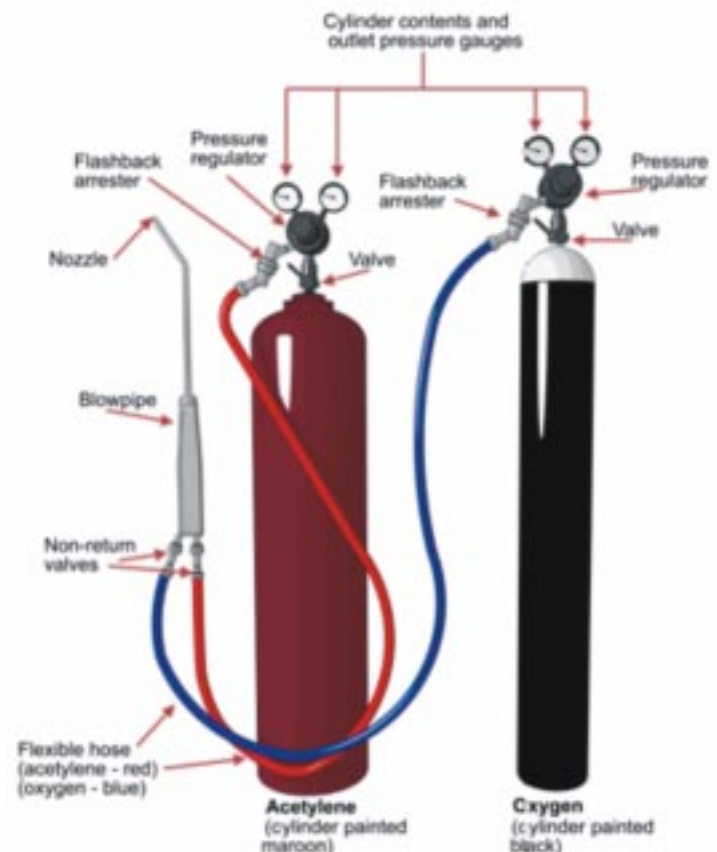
Typical equipment used in oxy/acetylene gas welding and similar processes
